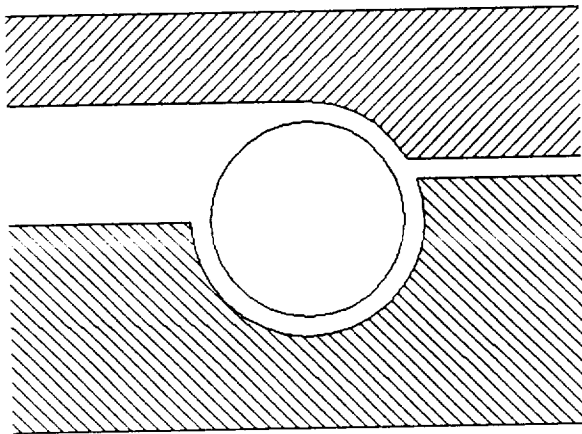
Schematic drawing of a possible weld defect due to insufficient flow around the retreating side of the clockwise rotating pin.
